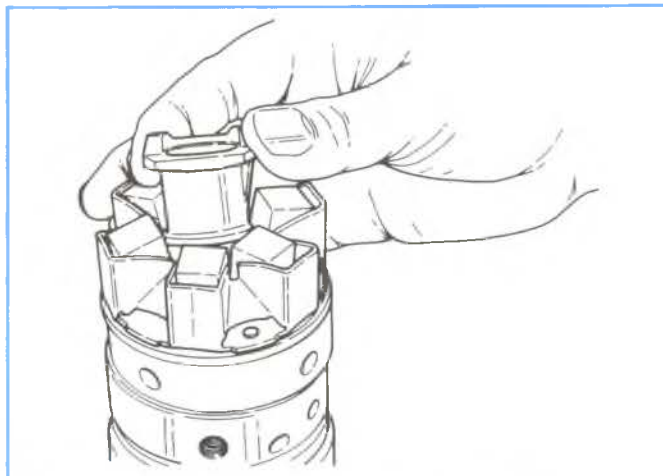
, Installing Thrust Sleeve and Checking Weights.
